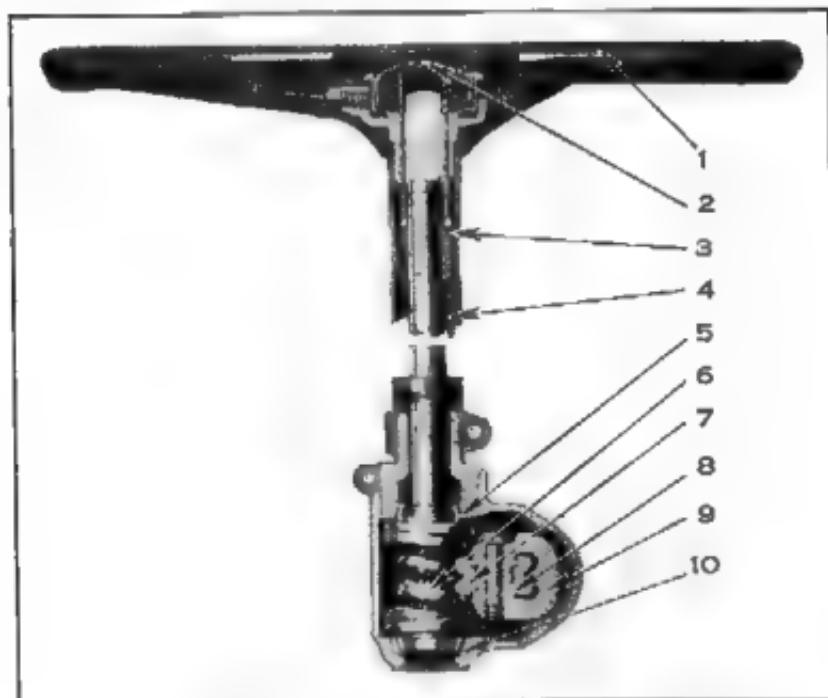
Steering Gear Assembly—Master De Luxe Models
